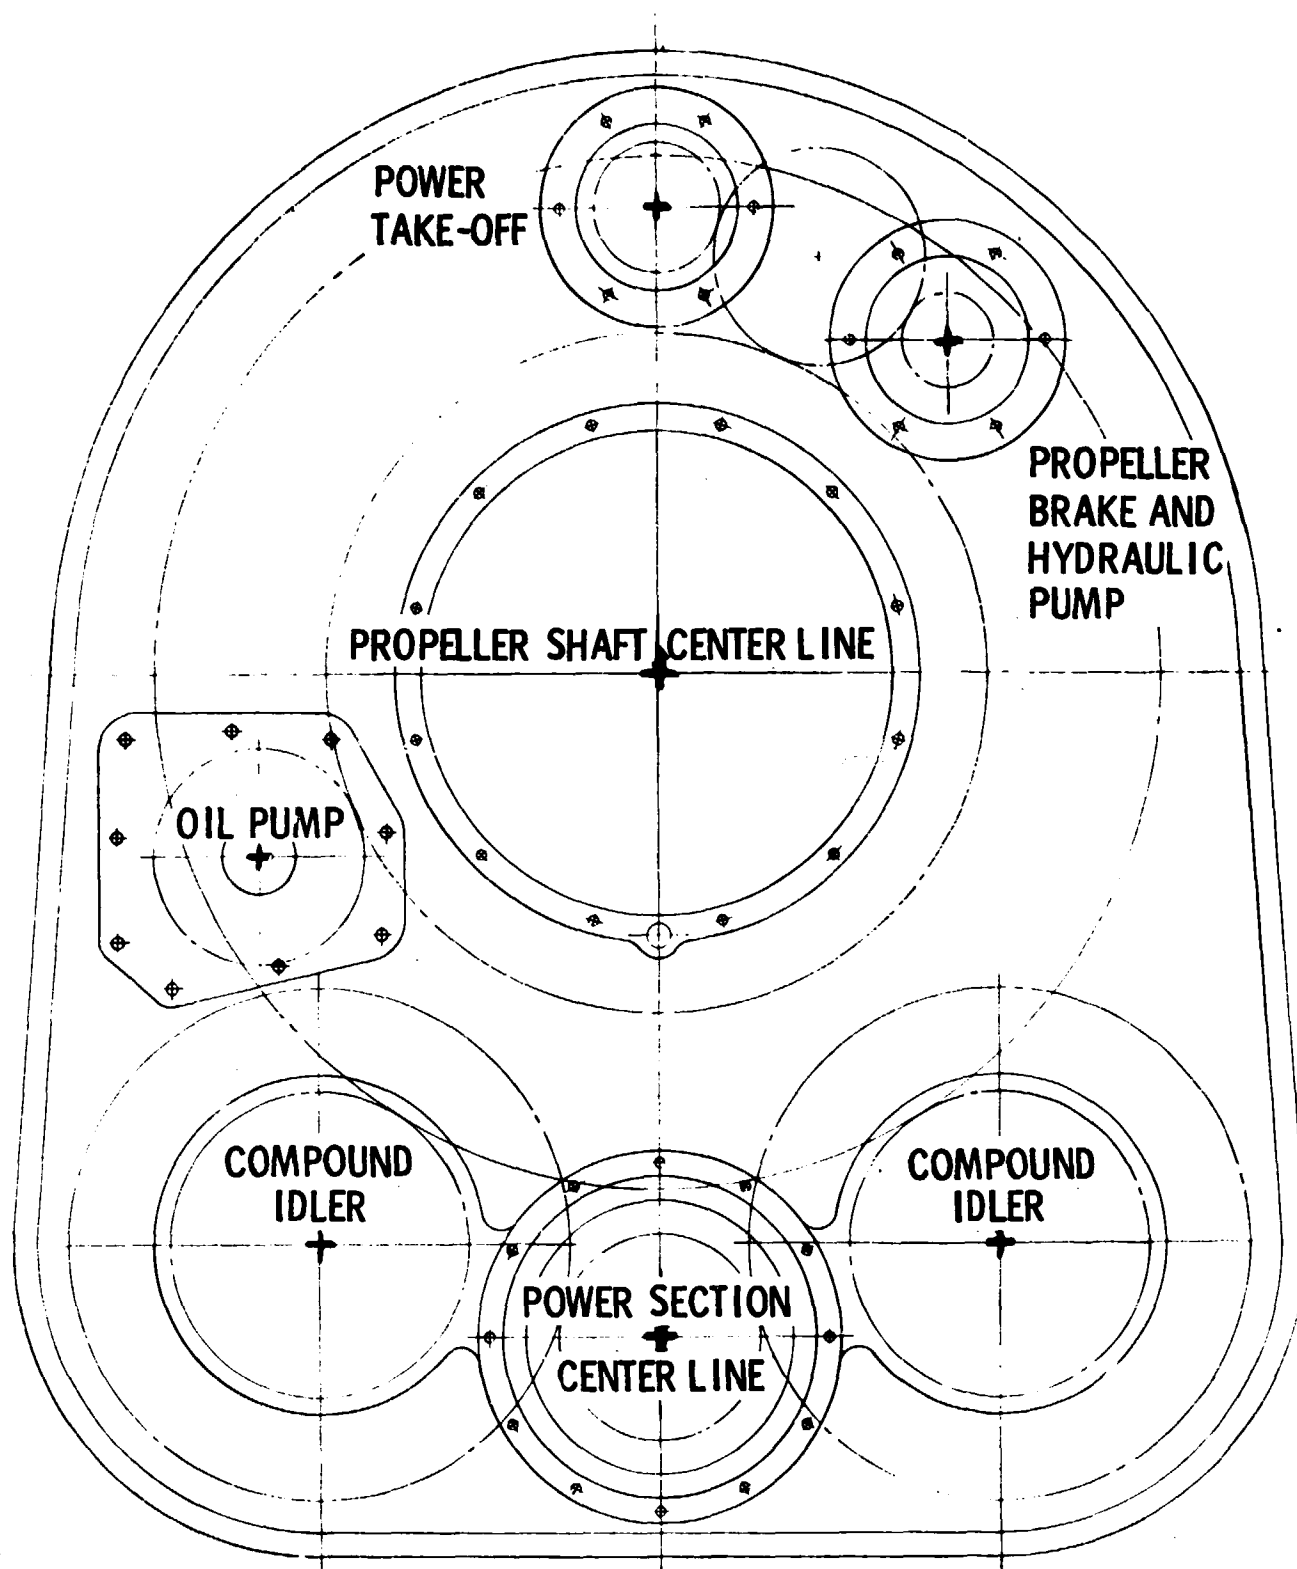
Rear view of compound idler reduction gearbox.
